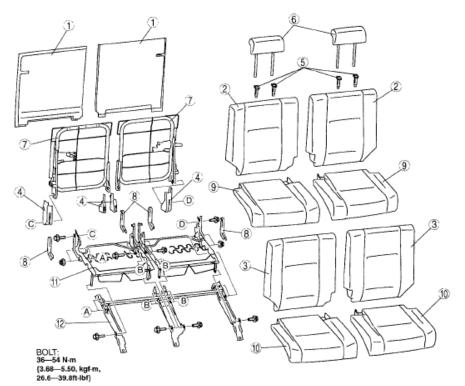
Identifying Third-Row Seat, Bolt & Torque Specifications Courtesy of MAZDA MOTORS CORP.
